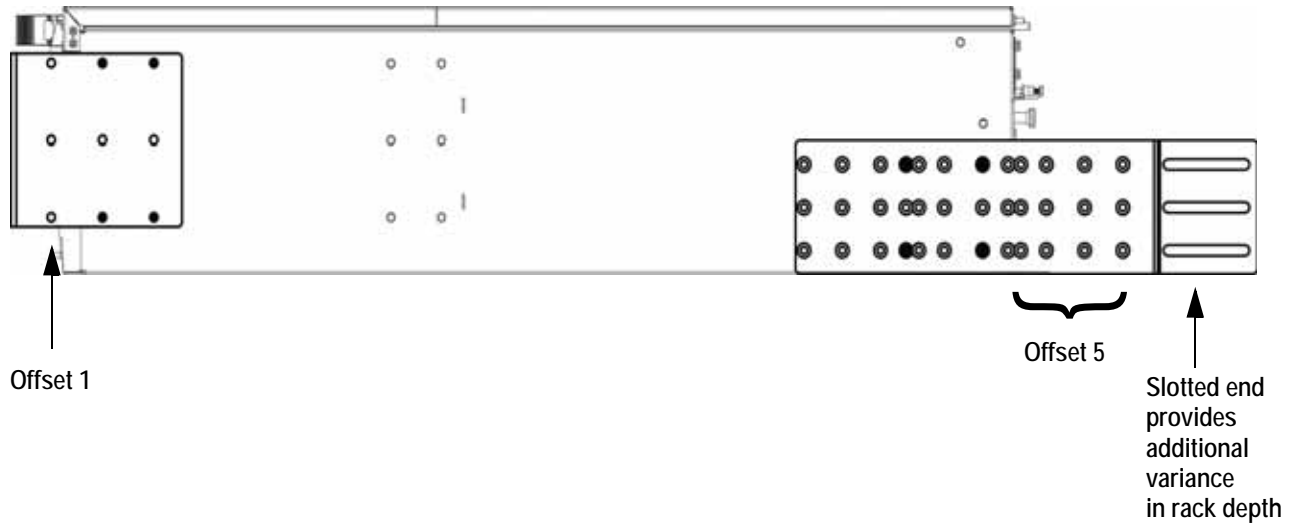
Bracket Mounting for 34" to 35.5" Rack
